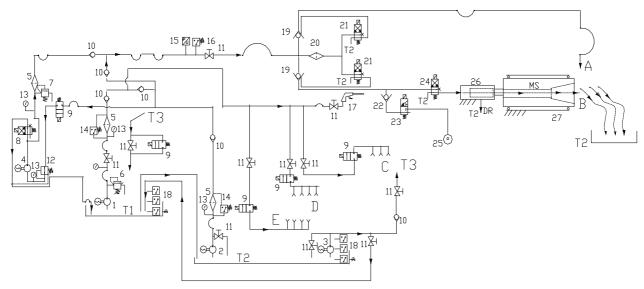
Diagram of the cooling unit of the milling machining centre with horizontal spindle, type MAXIM 11.
